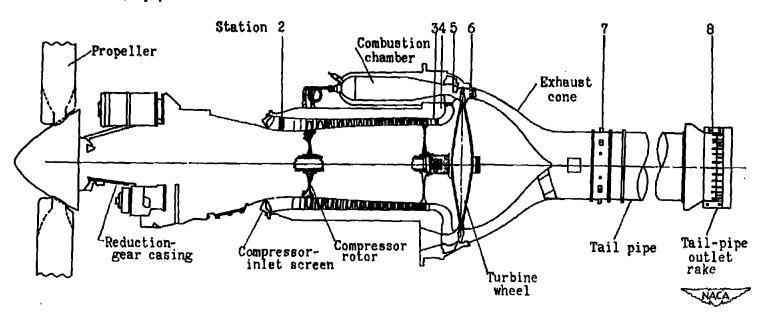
Side view of TG-100A engine showing location of measuring stations.
